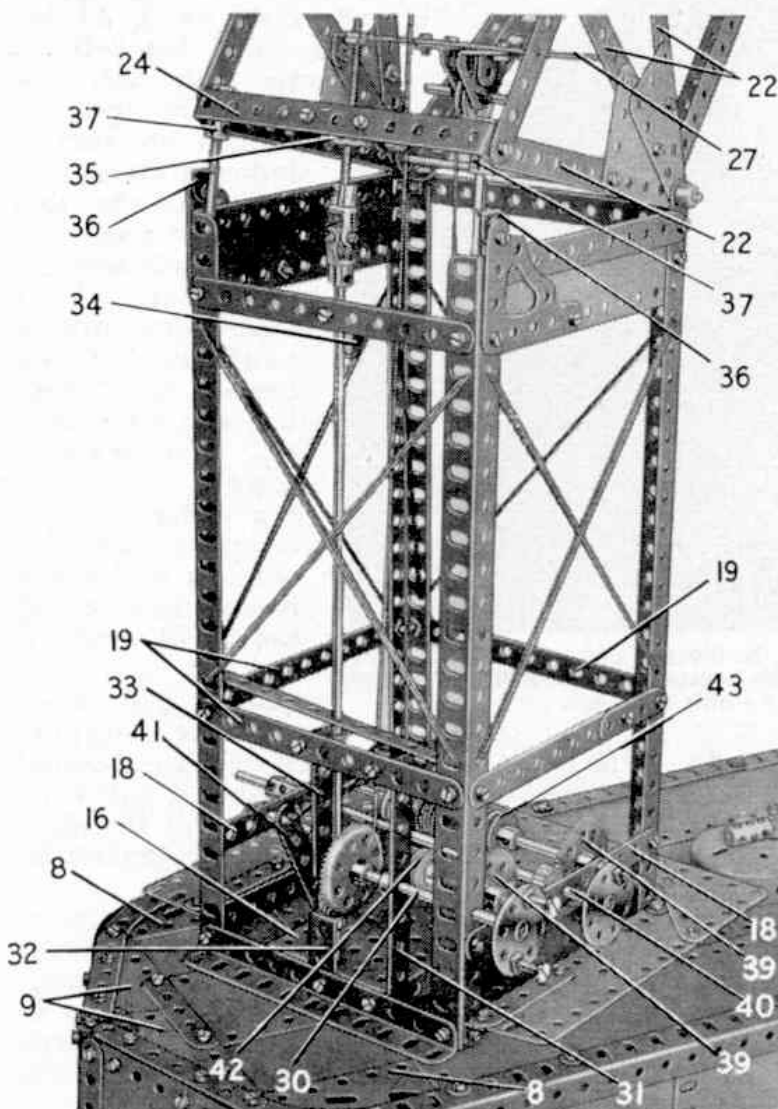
A close-up picture of the tower revealing details of the control handles and the gearing.
